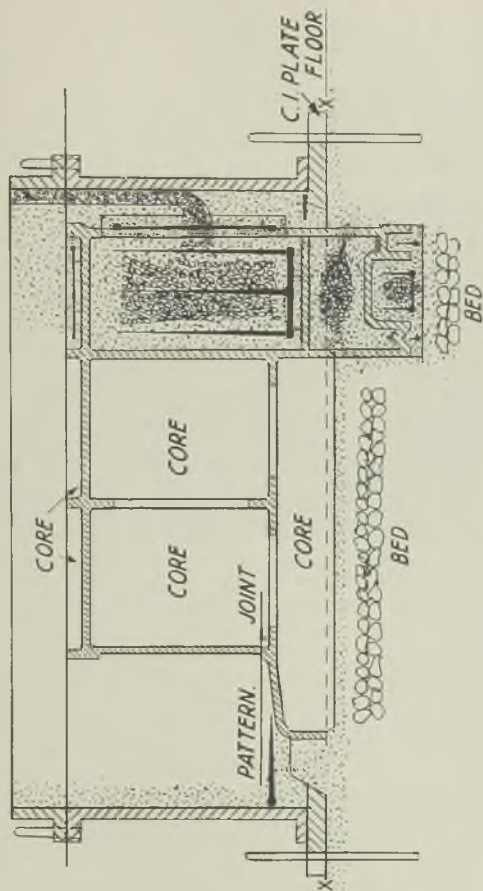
MOULD FOR GRINDING-MACHINE BED.
